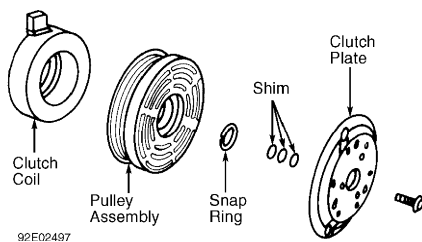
Exploded View Of Compressor Clutch (Ford FX-15)
